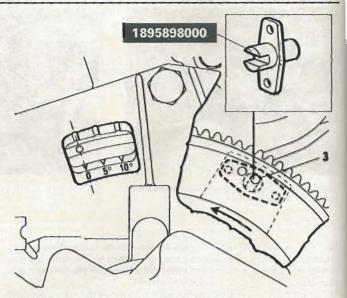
FIAT special tool used to position crankshaft speed/position sensor (Sec 13)
